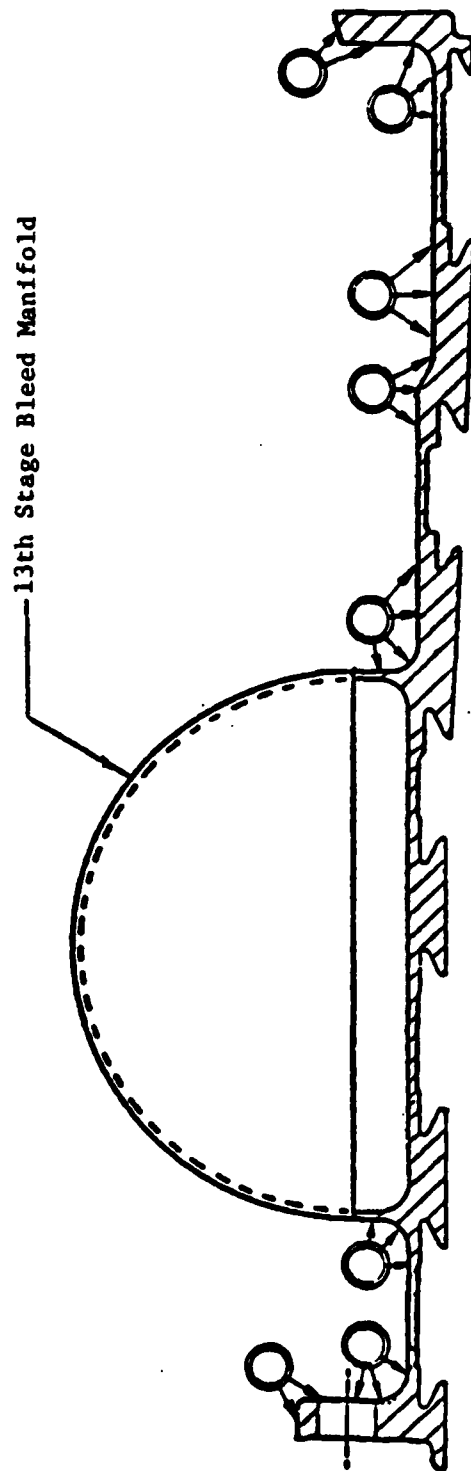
CF6-6 Rear Compressor Case Impingement Cooling Configuration.
